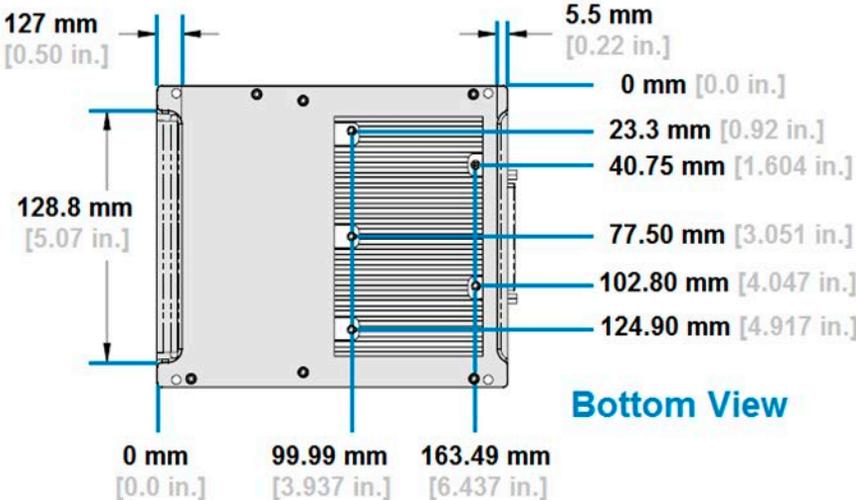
Dimensions - OEM Heat Sink, Bottom View
